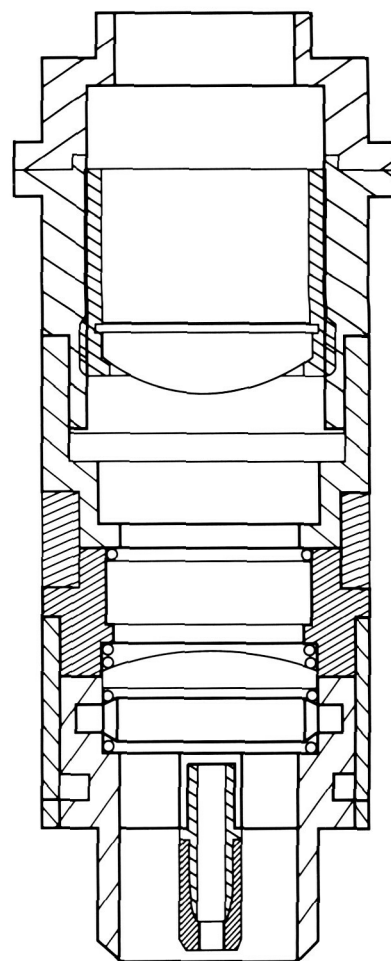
Sectional View of Gas Tungsten Arc Welding Torch
